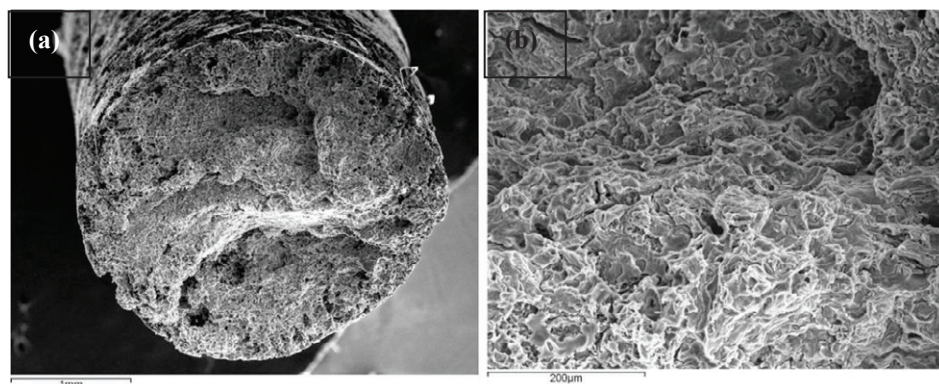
Fractograph of specimen failed in *m*-SBF at strain rate $2.2 \times 10^{-7} \text{ s}^{-1}$: (a) overall fracture surface of specimen, (b) evidence of transgranular cracking
